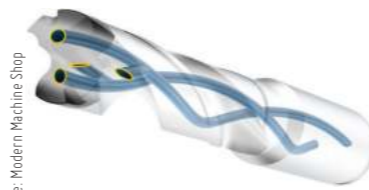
Additive manufacturing brings lightweighting to large-diameter tools, such as this 3D printed tool for machining the stator bore of an electric car motor. A more advanced version of this tool is now in use in the production and manufacturing of electric vehicles.
